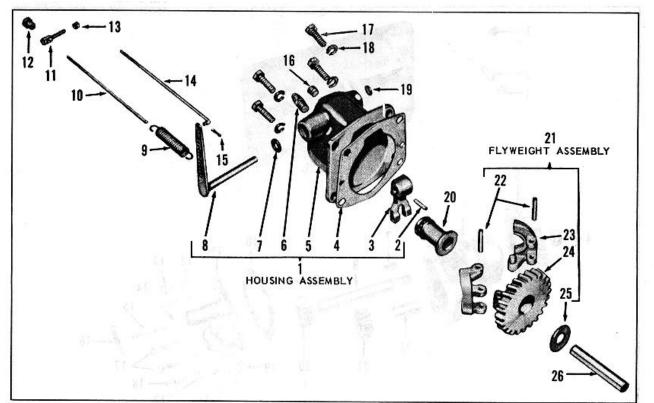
T 89K-S1, GOVERNOR ASSEMBLY
